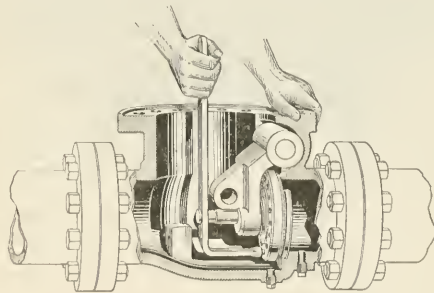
Drawing Illustrating Method of Grinding Valve Seat
